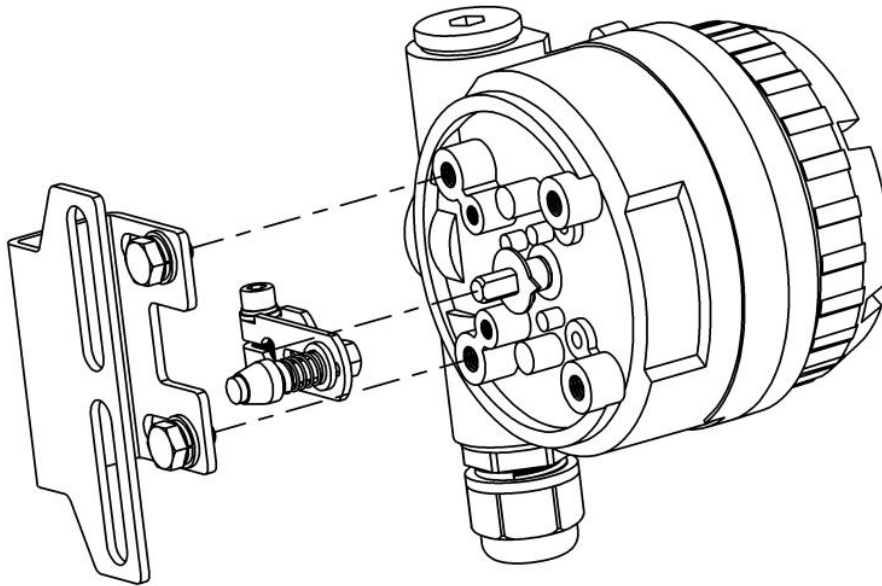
Feedback lever A and mounting bracket installation (remote type)
